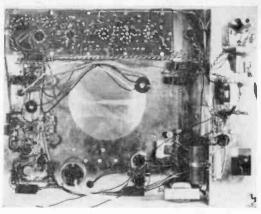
Rear view of chassis shows printed circuit board that saves lots of hard labor. Hole is for tube.
